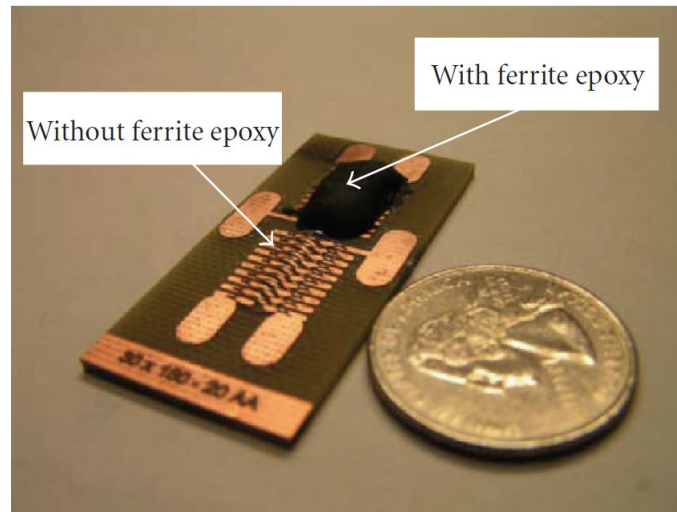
[19] Bondwire inductor with ferrite epoxy core fabricated on PCB.
